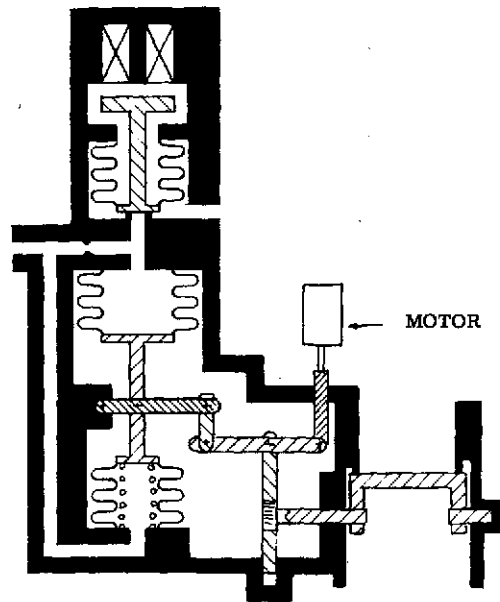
Actuator, Redundant Solenoid-Motor Bellows Linkage Driven
